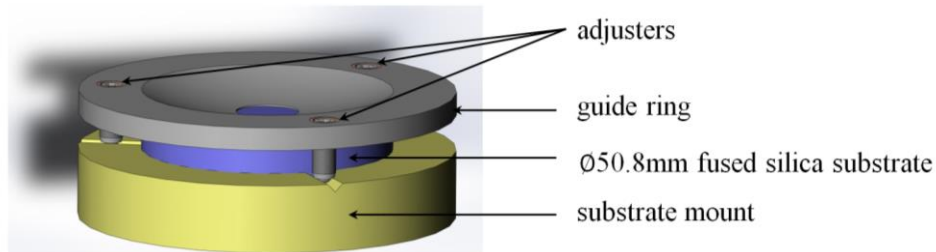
Solid model assembly of the guide ring tooling for 80mm radius phase fiducial fabrication on a 50.8mm optical flat.
